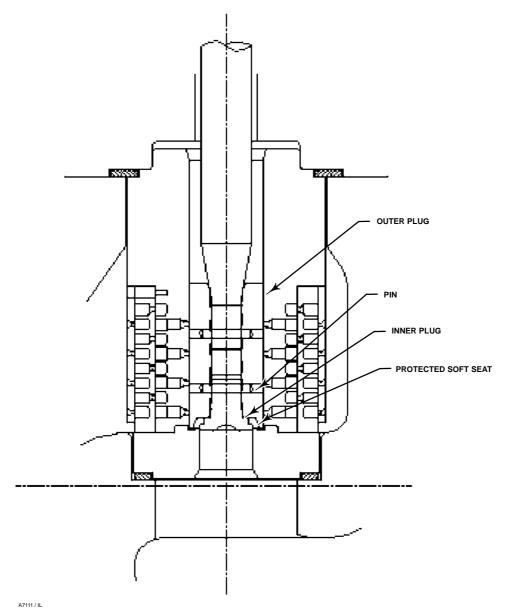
Typical Unbalanced TSO Trim Assembly, Small Port Designs (0.8125 Inch Port Diameter)
